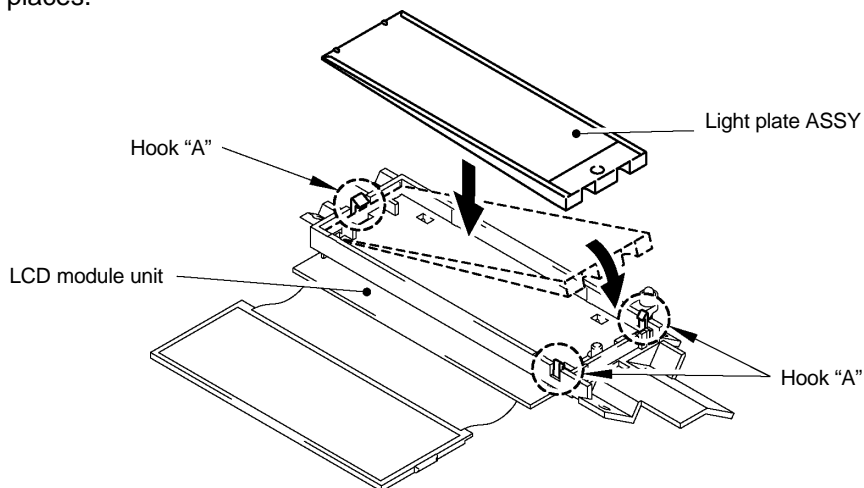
Reassembling the LCD Module Unit (3)
